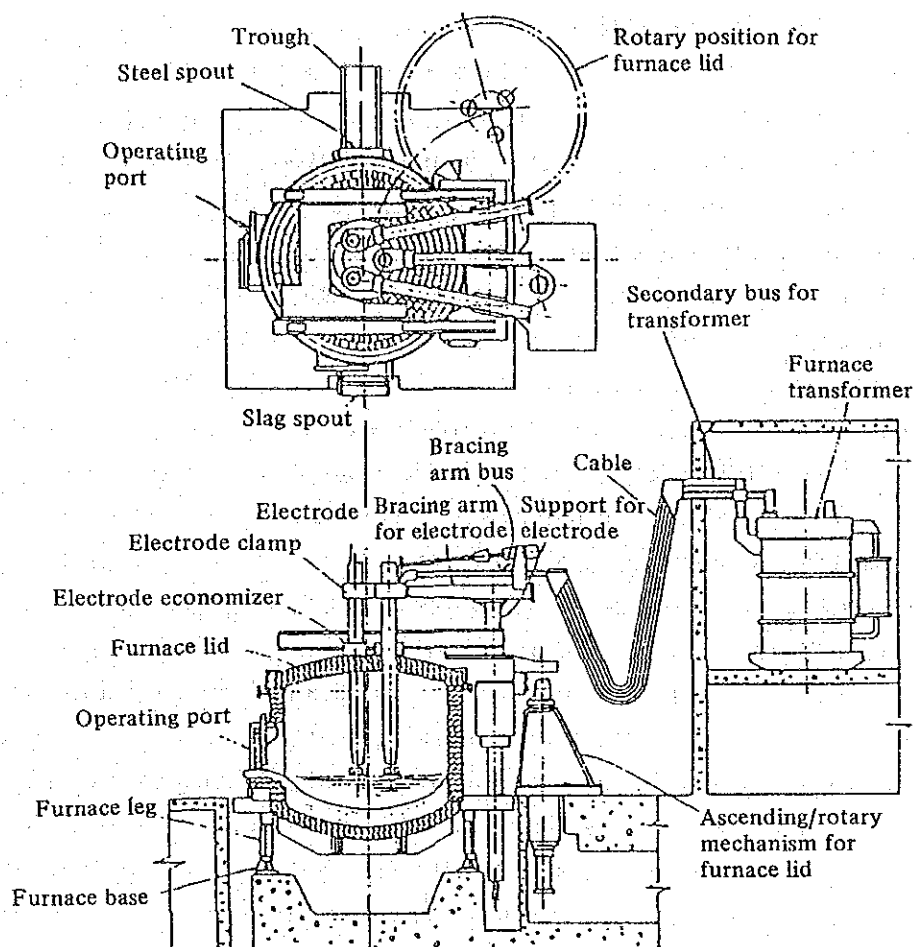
Structural outline of top charge-type arc furnace for steel manufacture
